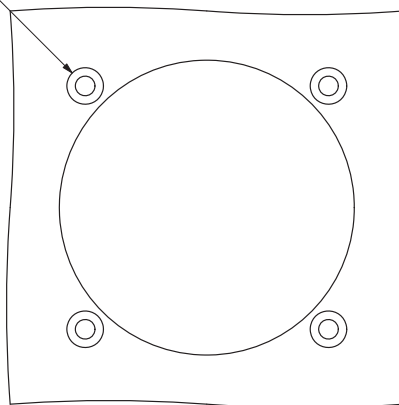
GSB 15 Panel Cutout Drawing w/Pan Head Screws (011-05043-00 and -01 Mounting Kits)
